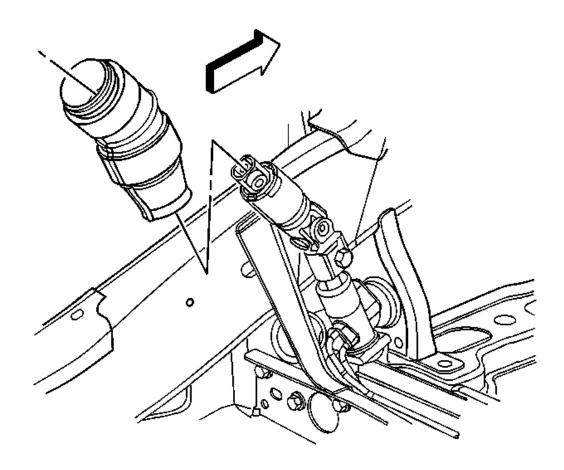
Removing/Installing Intermediate Shaft Boot Courtesy of GENERAL MOTORS CORP.
